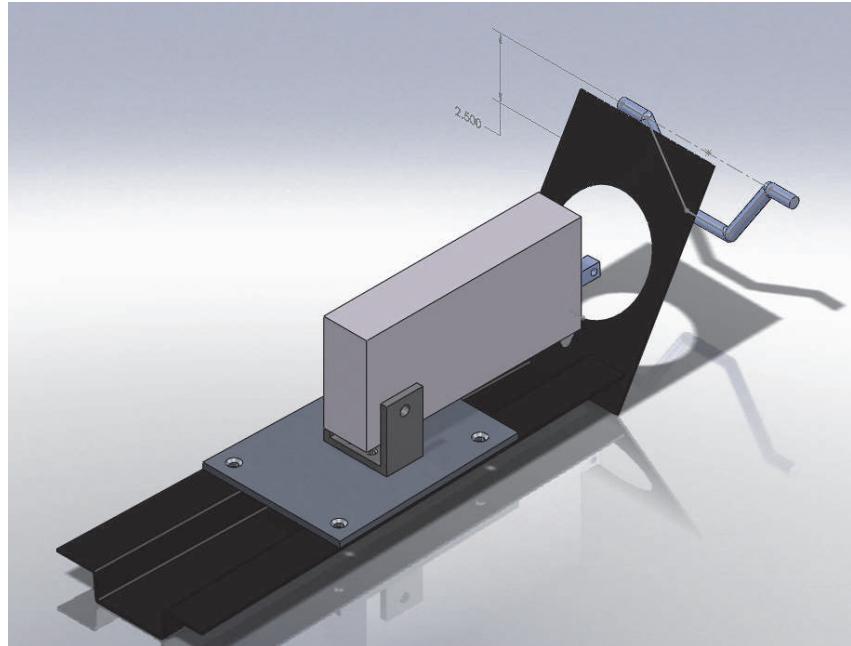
A CAD rendering of the entire Diesel actuation system. The full pedal arm is not shown, but would extend from the left side of the center column of the vehicle.
